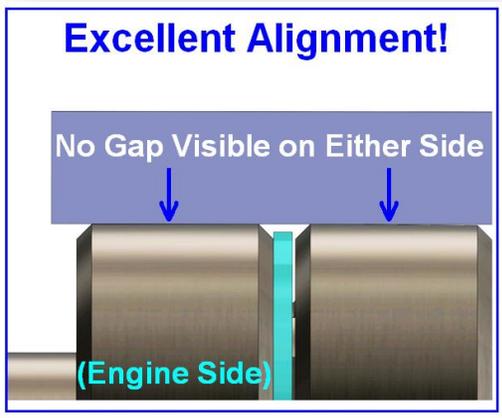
With perfect alignment, the straight-edge should make uniform contact when laid across the top and the side of the coupling halves. If a feeler gauge thicker than .010" can be inserted between the straight-edge and either half of the coupling, further adjustment and shimming is required.
